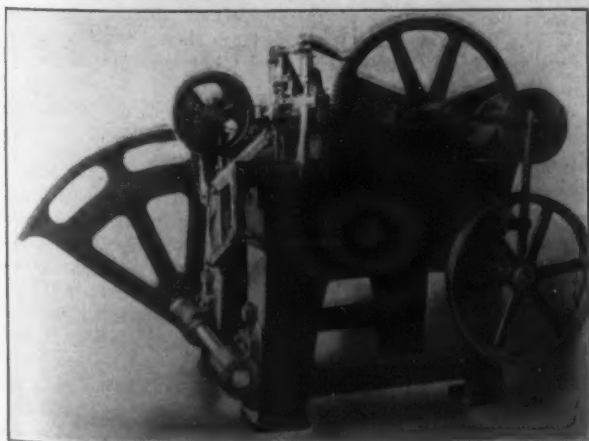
Baird No. 2 Spring Winding and Cutting Machine.
